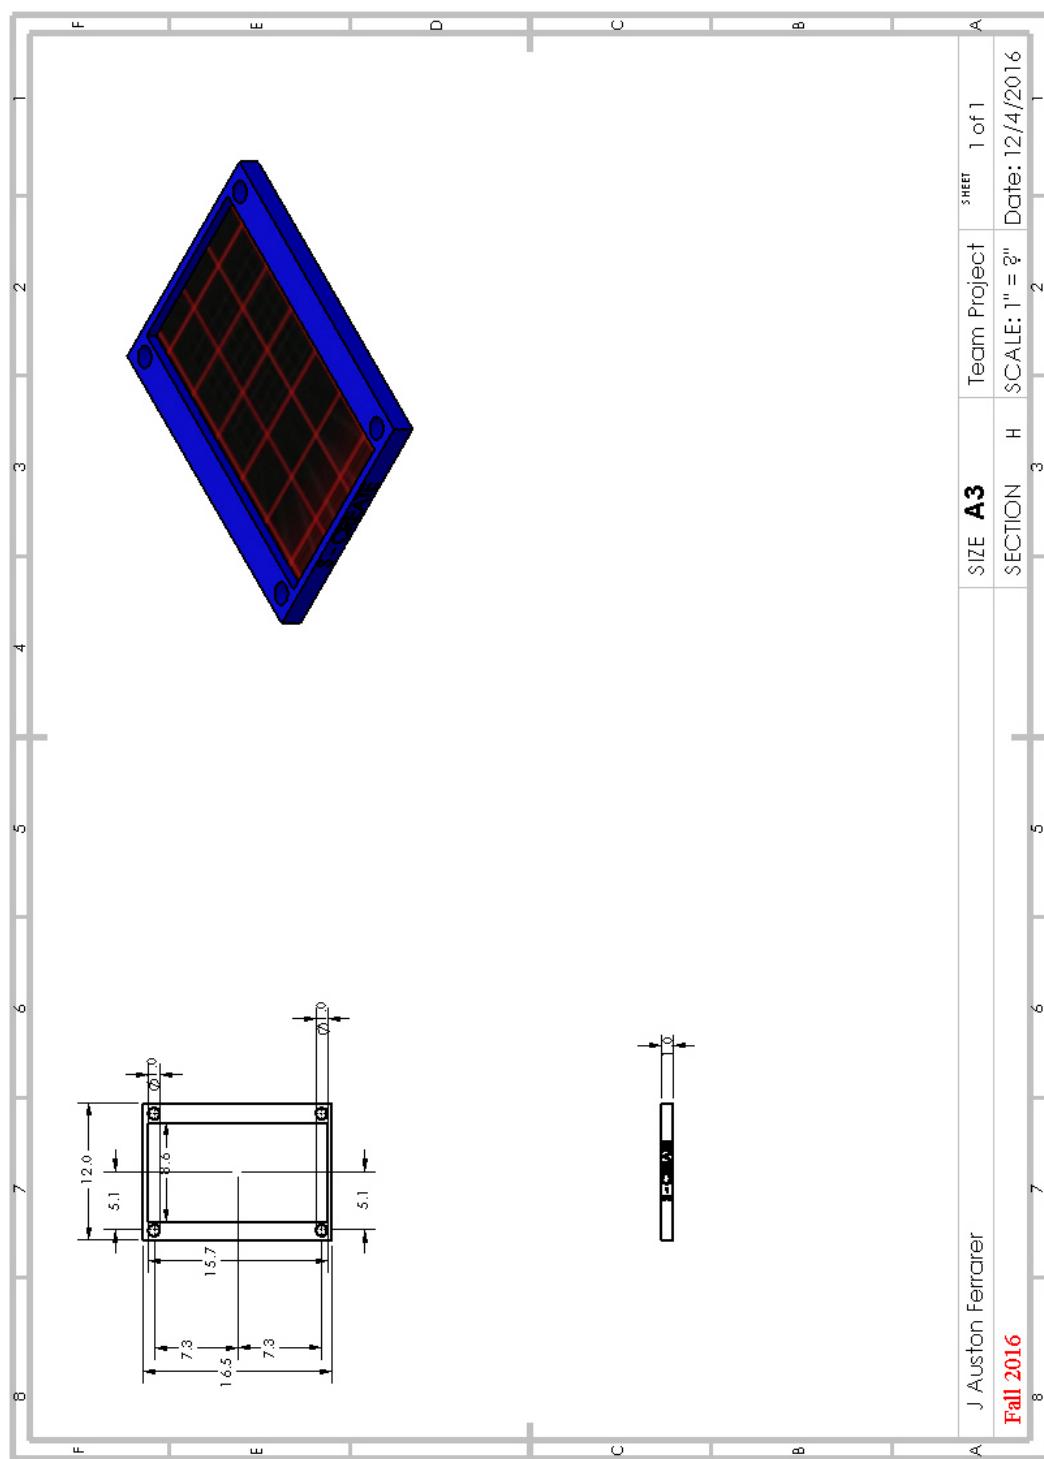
Ferrarer, Auston: Printing Pad
